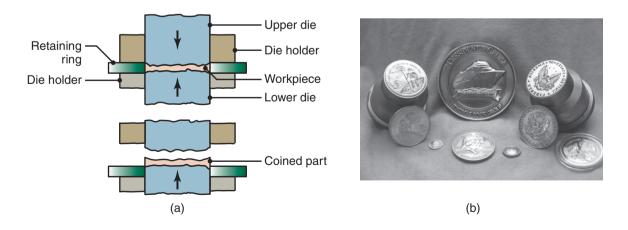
(a) Schematic illustration of the coining process. (b) An example of a modern coining operation, showing the coins and tooling. Note the detail and superior surface finish that can be achieved in this process. *Source:* Courtesy of C & W Steel Stamp Co., Inc.
